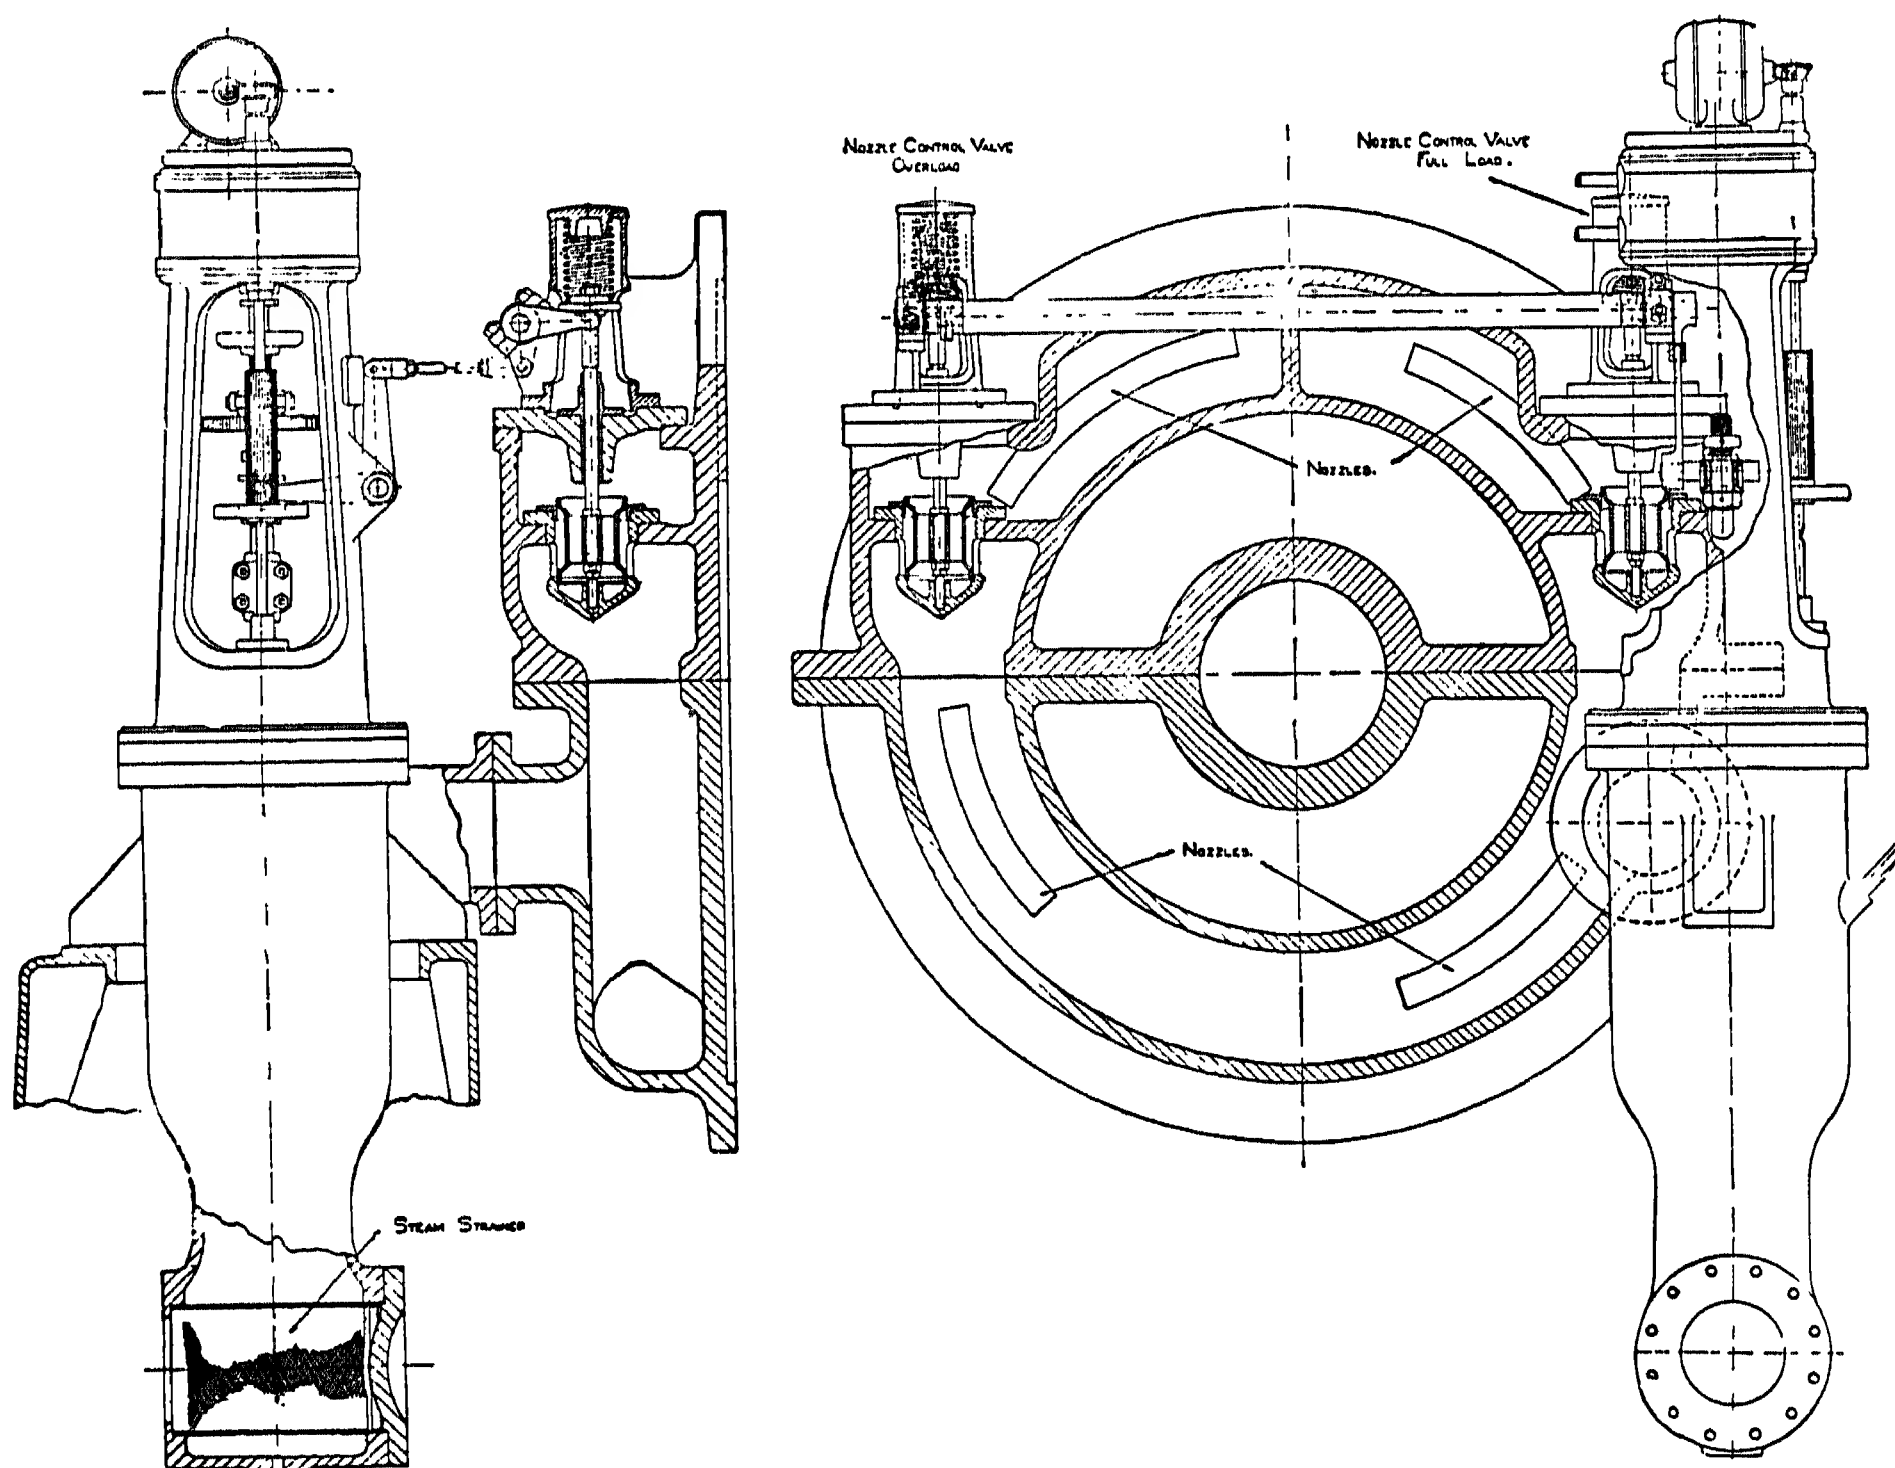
Governor Gear showing Arrangement of Nozzle Control Valves of English Electric Company's Zoelly Turbine
